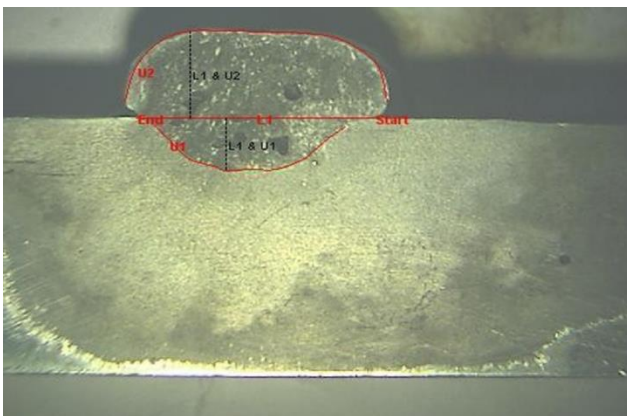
weld penetration analysis of Flux 6. Voltage 32V
